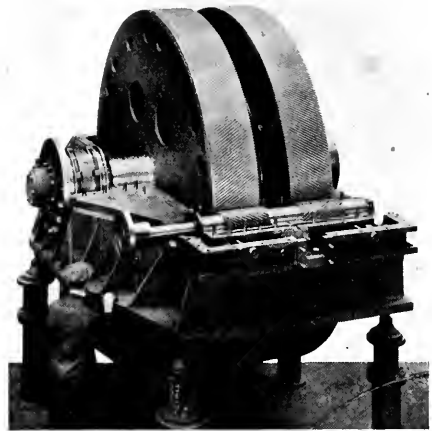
View of reduction gear with cover removed showing pinion, floating frame and thrust bearing.
